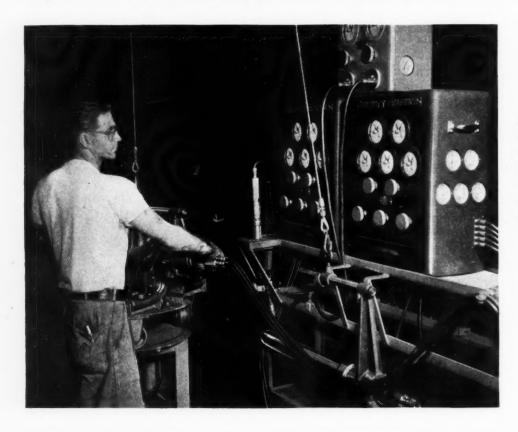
Inside Diameters of the Five Camshaft Bushings, the Five Main Bearings, and Two Distributor Pilotholes of the Engine are Inspected with Multipleplug Type Air Gages
